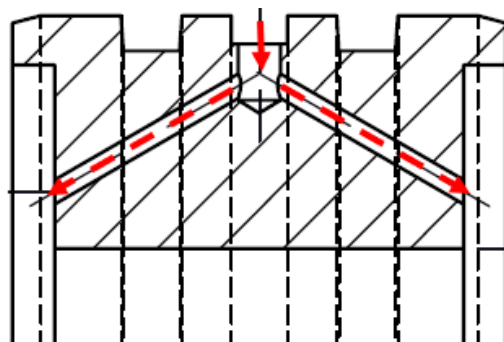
Outer spacer and the path of oil air mist lubrication to the bearings of the HSPM generator
